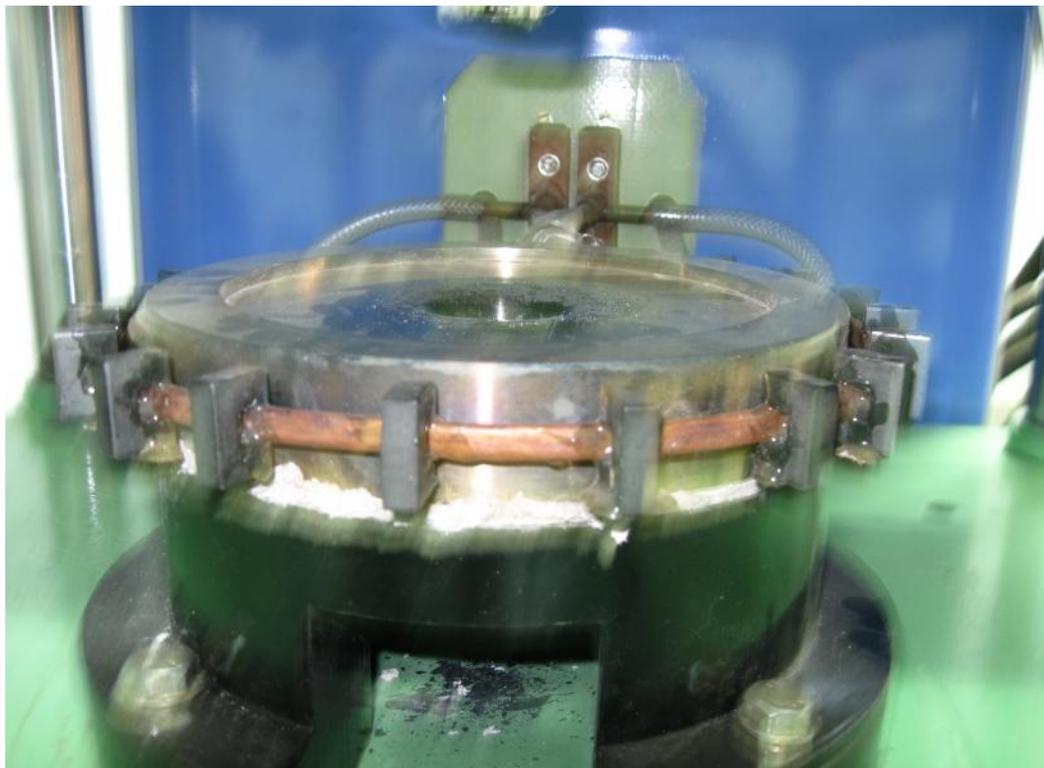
Induction coil connected to the Inconel die for heating it up to 500°C.
